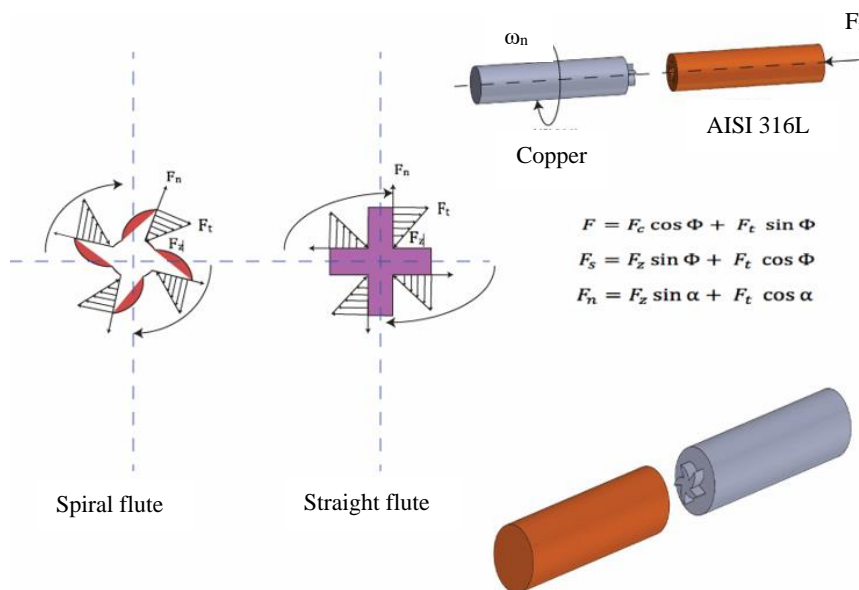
Mechanism of profiled sockets in rotary friction welding
